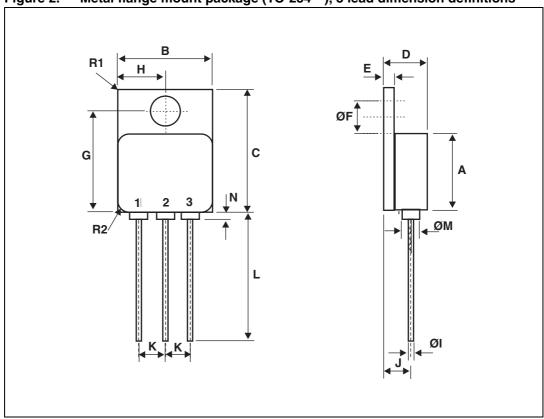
Metal flange mount package (TO-254^(a)), 3 lead dimension definitions
